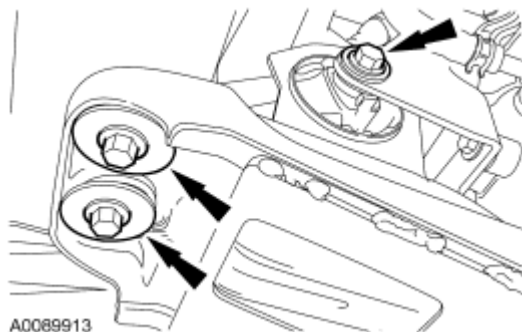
Identifying Front Roll Restrictor Bolt & Bolts For Engine Support Crossmember
